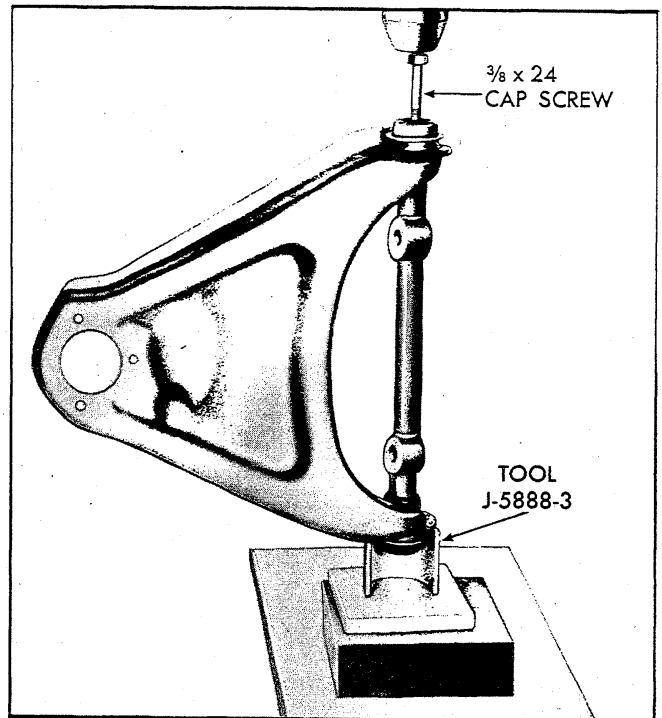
Removing Upper Control Arm Cross Shaft Bushings
